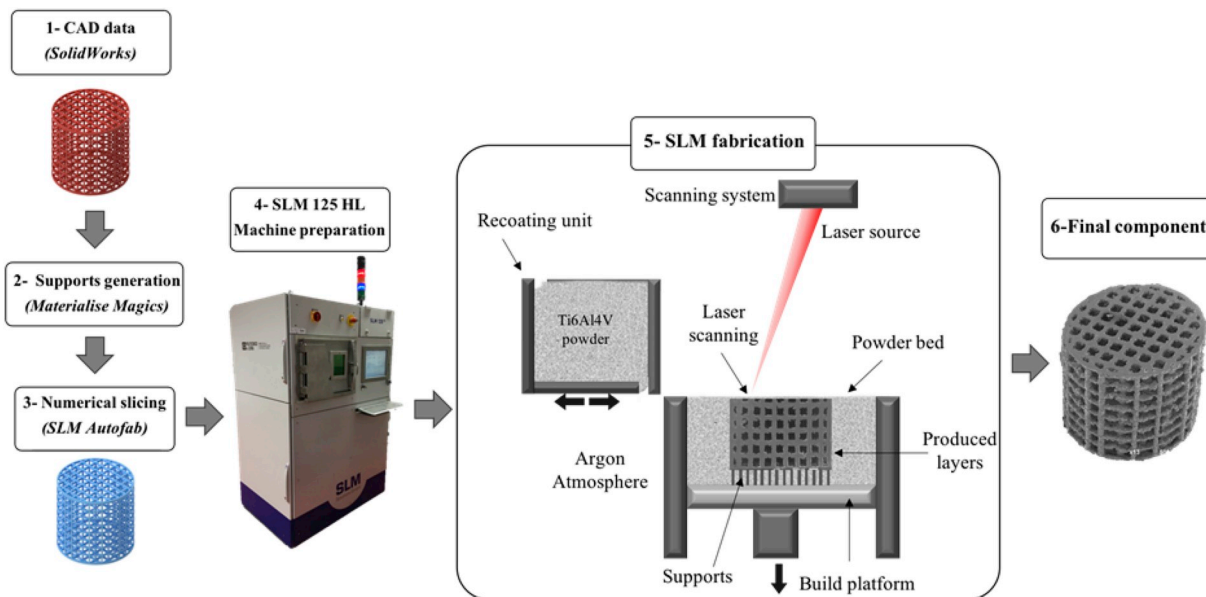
Schematic representation of SLM technique from CAD data to final component.
